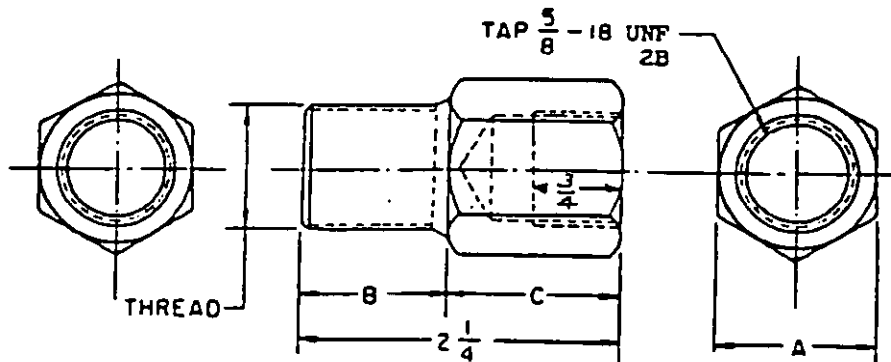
Type XIII class 1, style A puller adapter, forcing screw thread size adapting, mechanical, gear and bearings, male and female thread with 5/8 - 18 UNF-2B tapped hole. (See Table XII for size specification.)
